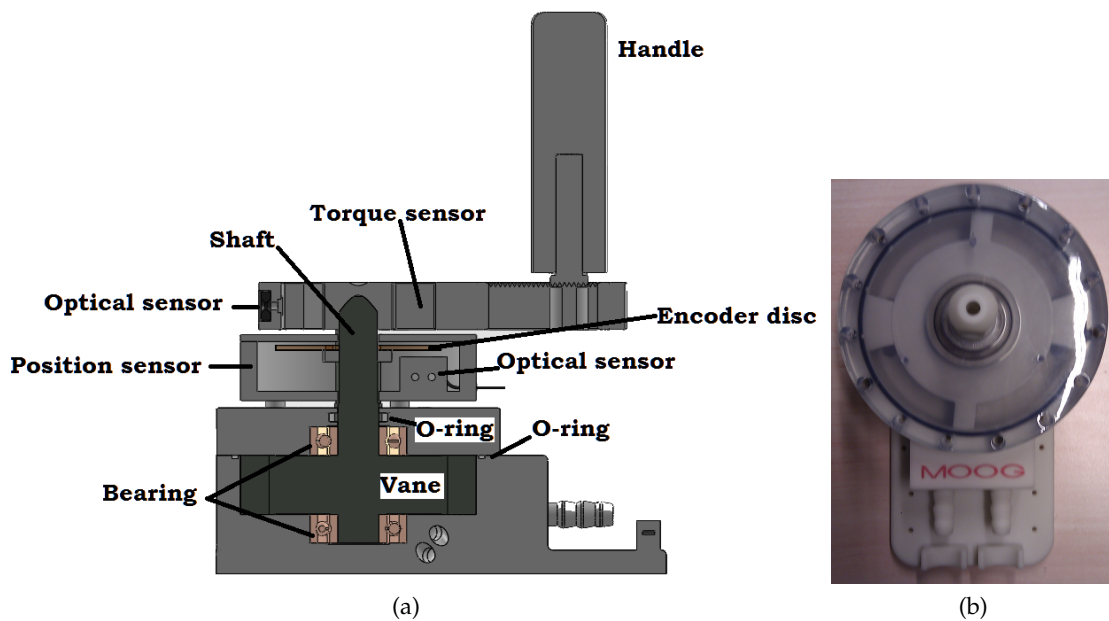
(a): A cross-sectional drawing of the vane motor with torque and position sensor. (b): Top view photograph of the drawing displayed in (a), without the sensors.
